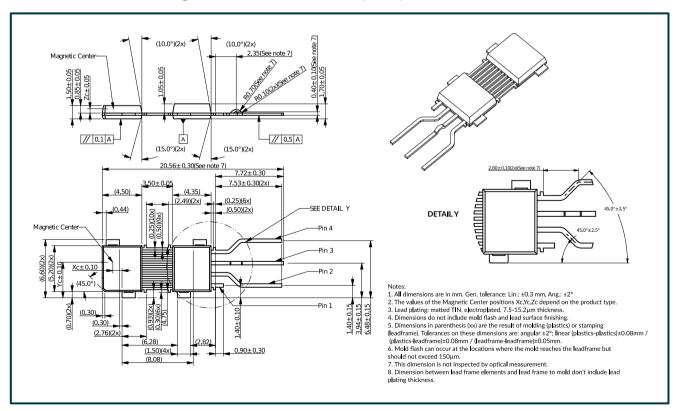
DMP-4 STD2 2.54 Package Outline Drawing
